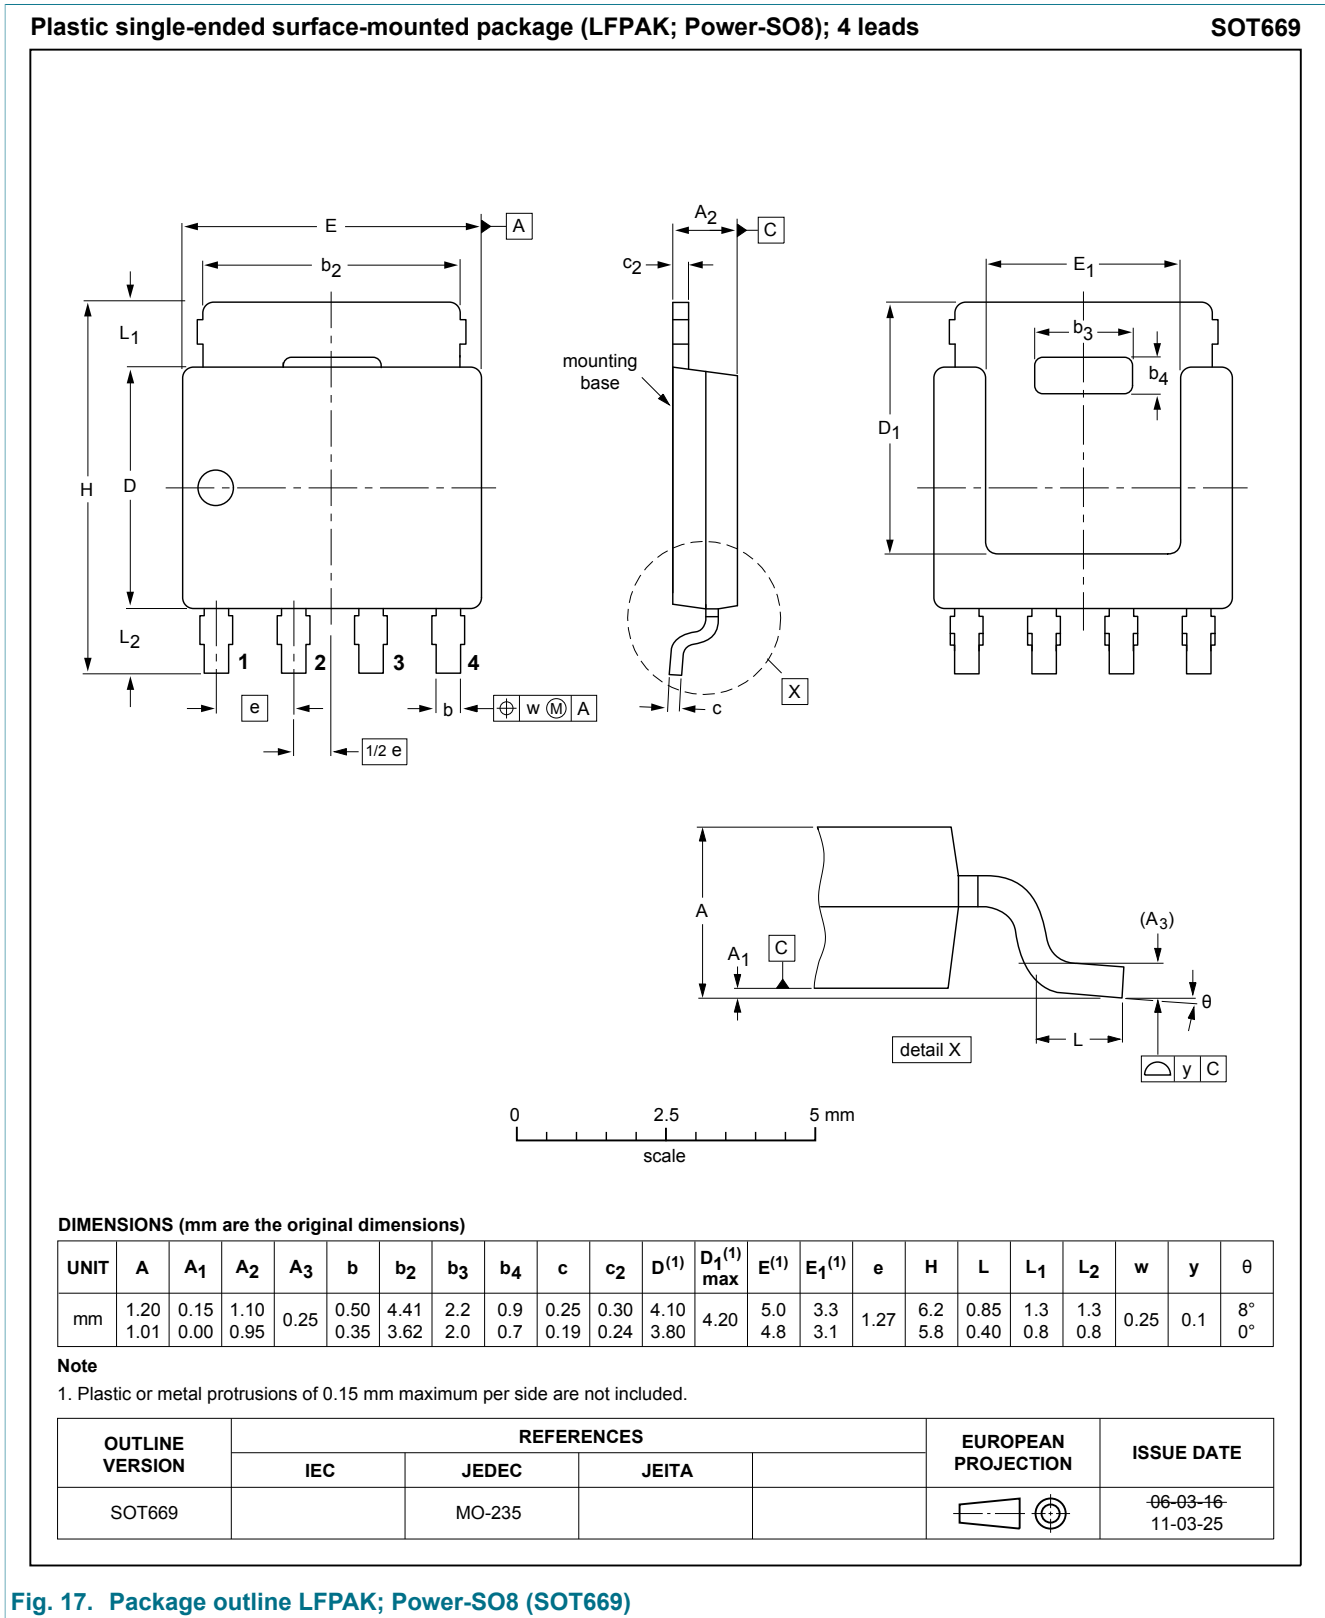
Package outline LPAK; Power-SO8 (SOT669)
